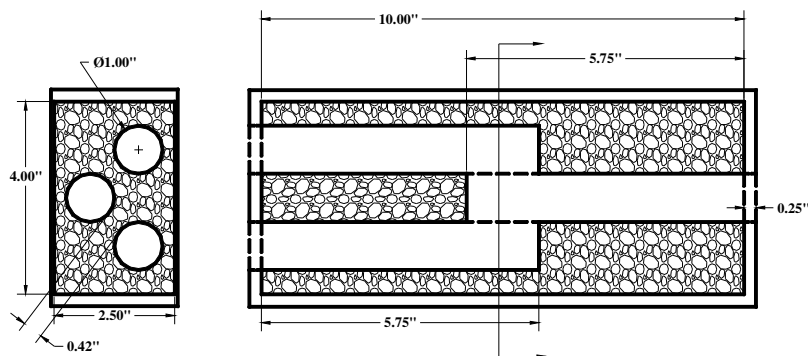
Drawing of the *box with 3-hole foam* silencer design.
